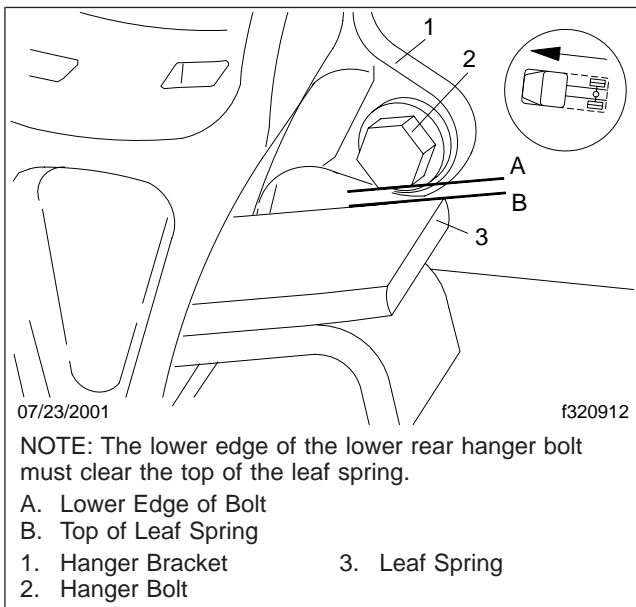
, Clearance Between the Leaf Spring and the Hanger Bolt
